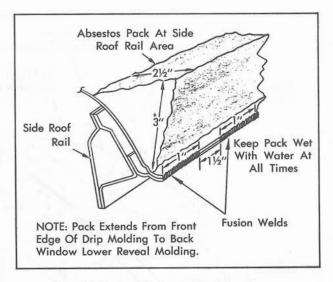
Installation of Roof Panel to Side Roof Rail Extension
